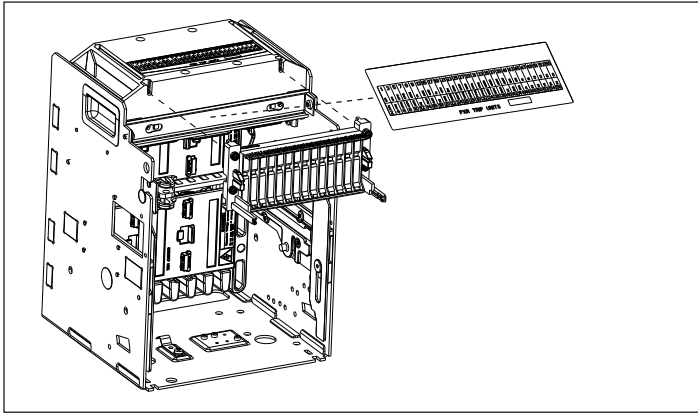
Terminal block mounting bracket and cassette secondary over label installation.
